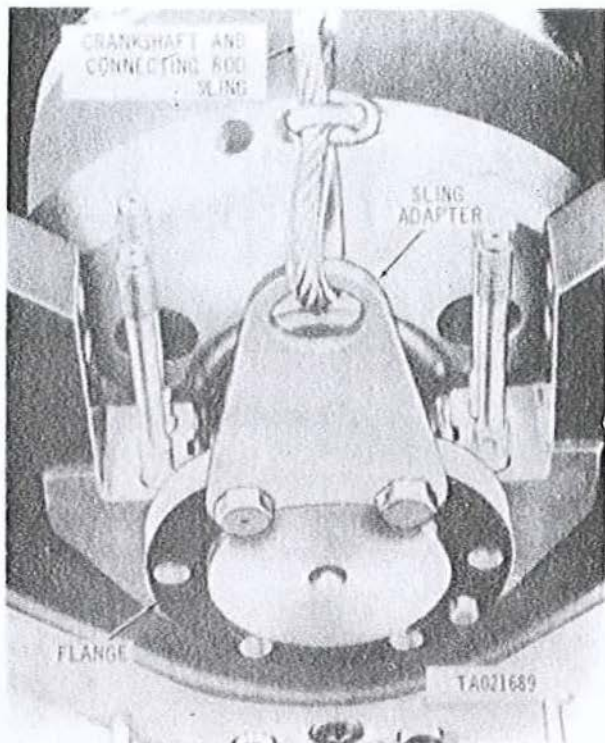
Installing or removing crankshaft and connecting rod sling at crankshaft torsional vibration damper flange.
